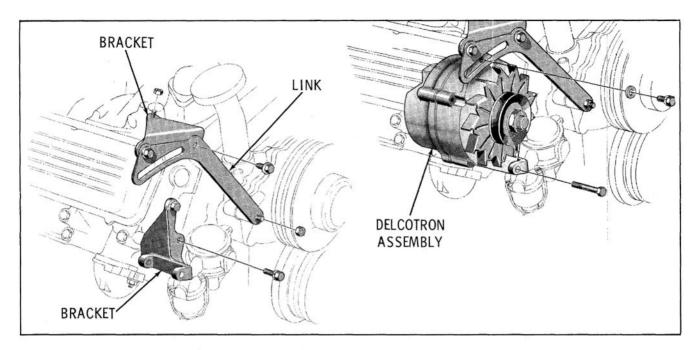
Delcotron Installation (33-34-35-36-38 & 39 Series)
